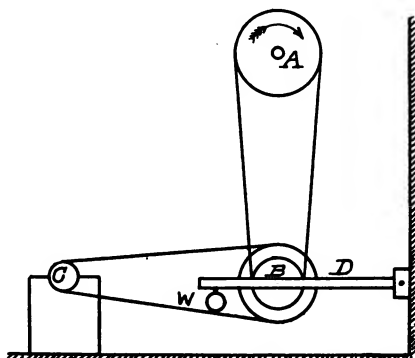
Transmission Gear between Windmill and Dynamo for obtaining constant Speed of the latter.
